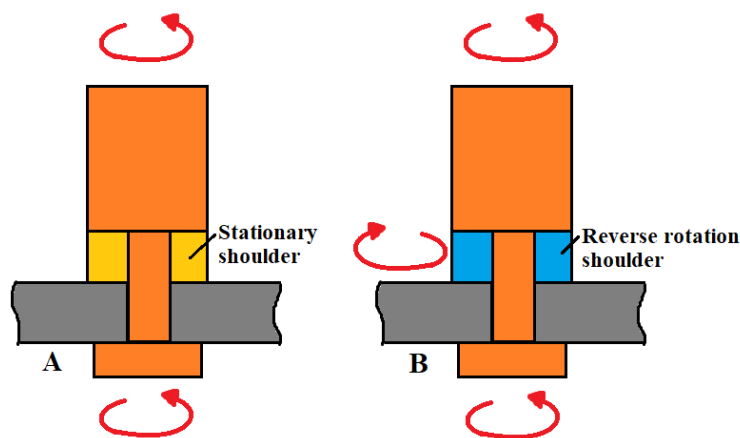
Bobbin tool FSW tools. (Modified from [2]). A: stationary shoulder BT-FSW tool, B: reverse dual-rotation BT-FSW tool
